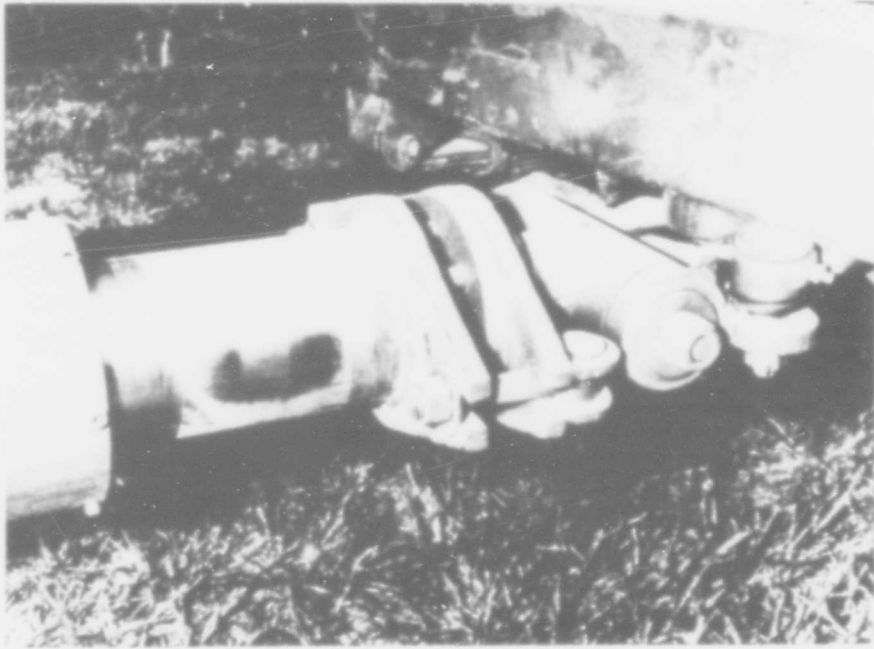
DRAWBAR CONNECTED TO STEERING INPUT SOCKET AT FRONT END
